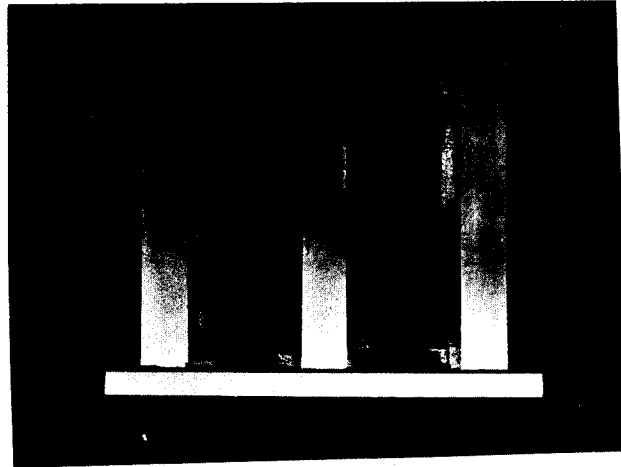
B/E sandwich panel with aluminum strips .006" thick, 1" wide, spaced 2 3/4" apart
